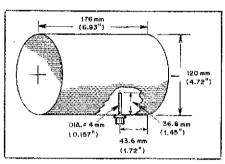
The tubular radiator for 1691 MHz consists of a metal cylinder with one end open. This end faces the dish. The rod element should be soldered directly to the type-N connector. The connector should have a provision to slide 5 mm (0.197 in.) forward and backward to find the best position.
